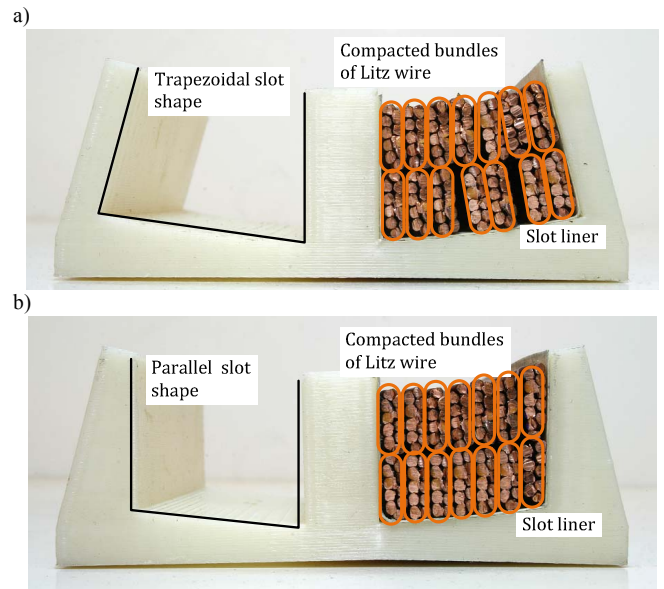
Rapid prototyped sectors of the stator assembly with compacted Type-8 Litz wire winding conductor option; a) trapezoidal shaped slot geometry, b) parallel sided slot geometry
